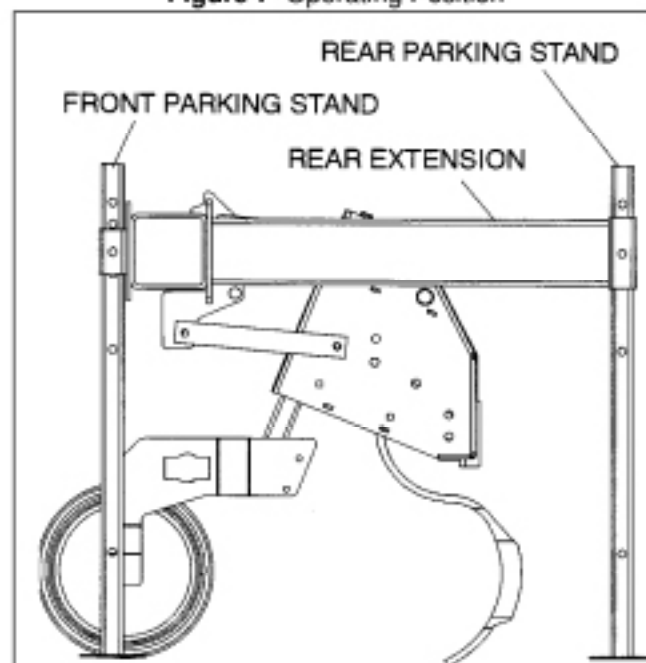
Front & Rear Parking Stands (Type F Toolbar)
